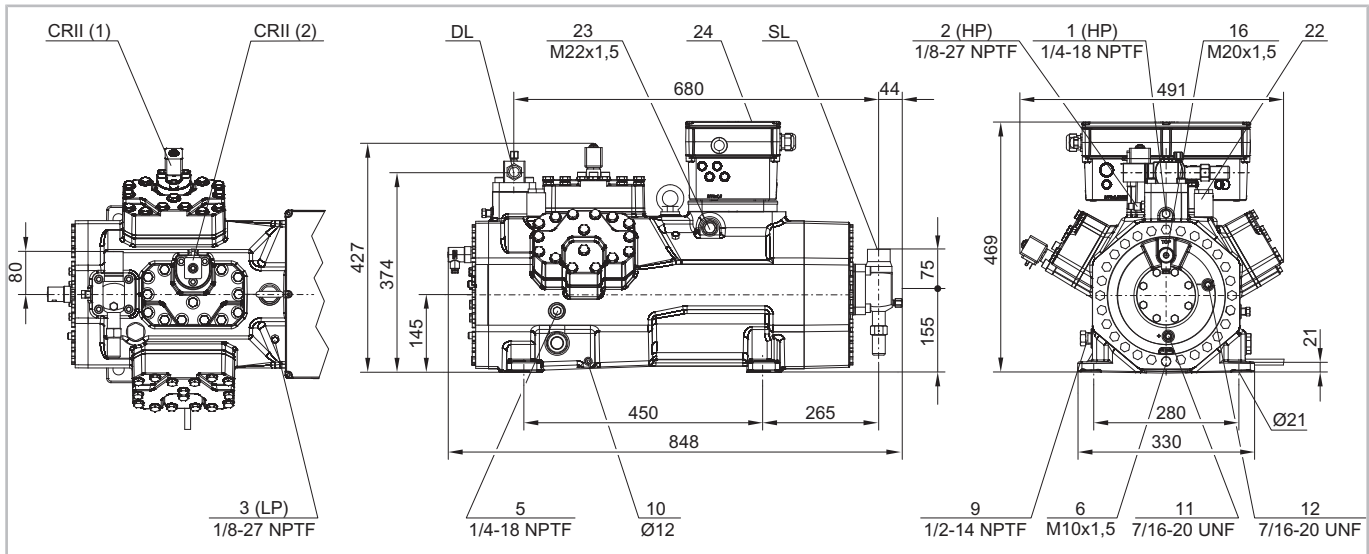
Dimensional drawing 6FTEU-35LK .. 6CTEU-50LK (representation with optional IQ MODULE and CRII)
